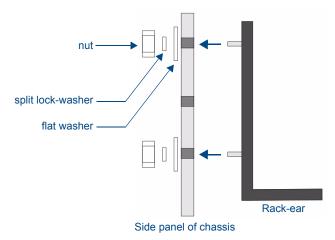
Insert the four mounting posts on the rack-ear into a matching set of holes on the chassis
